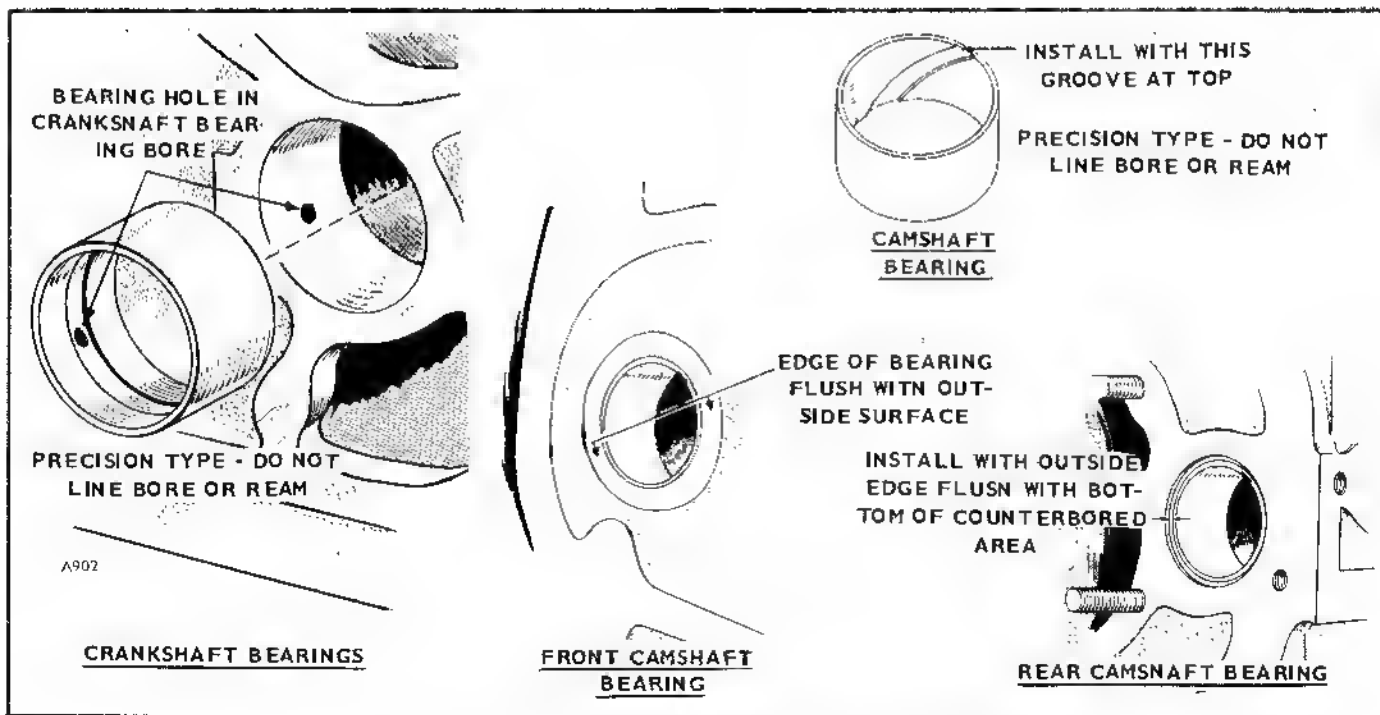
CAMSHAFT AND CRANKSHAFT BEARINGS
